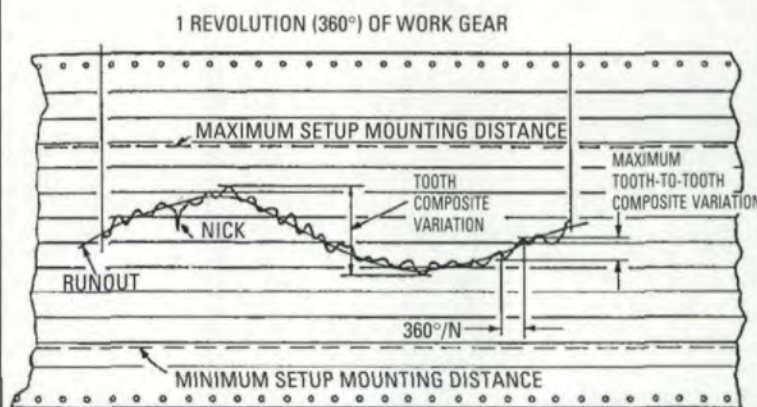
Chart of typical gear tooth errors - work gear rolled with master gear in dual flank fixture.
